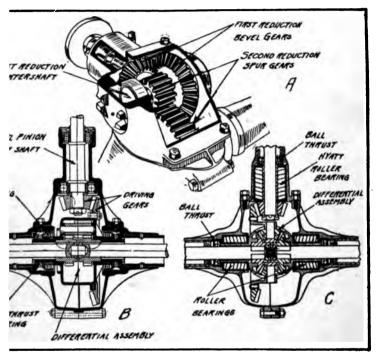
Showing Construction of Non-Adjustable Bevel Gear Drive Units.
